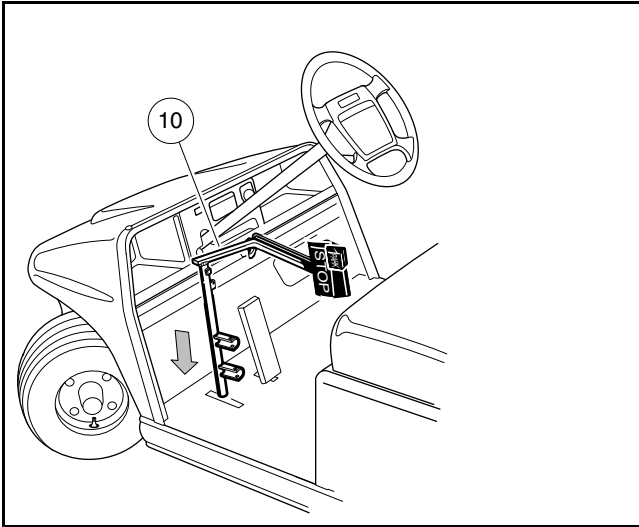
Brake Pedal Weldment Through Floor
